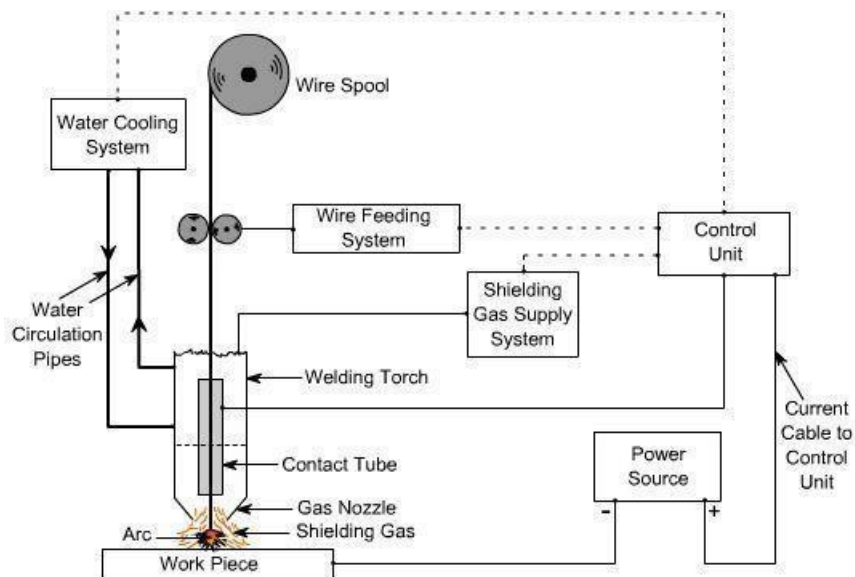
Schematic Diagram of GMA Welding
